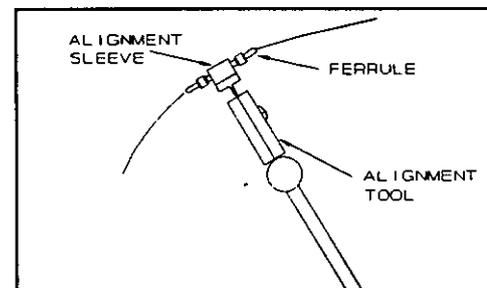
C1-10. Inserting second ferrule into alignment sleeve.
